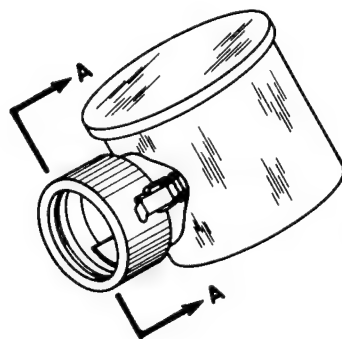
EXPLODED LAYOUT · SECTION "A-A"
